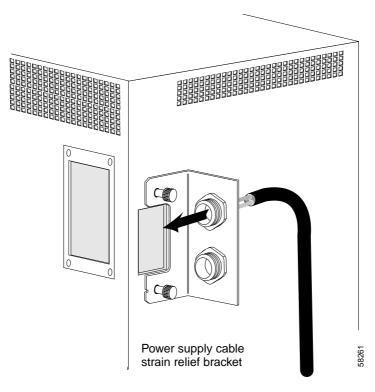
Inserting the Cord Through the Power Supply Cable Strain Relief
